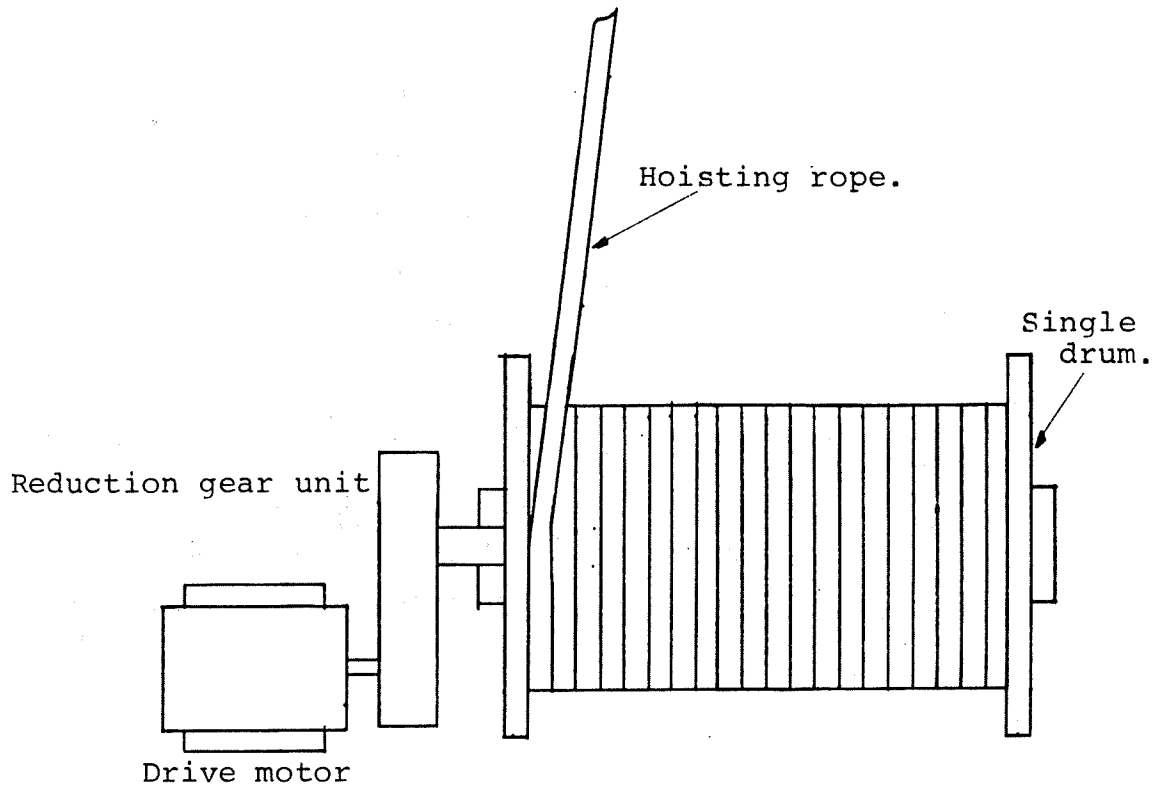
Single cylindrical drum - single rope. Top view.
